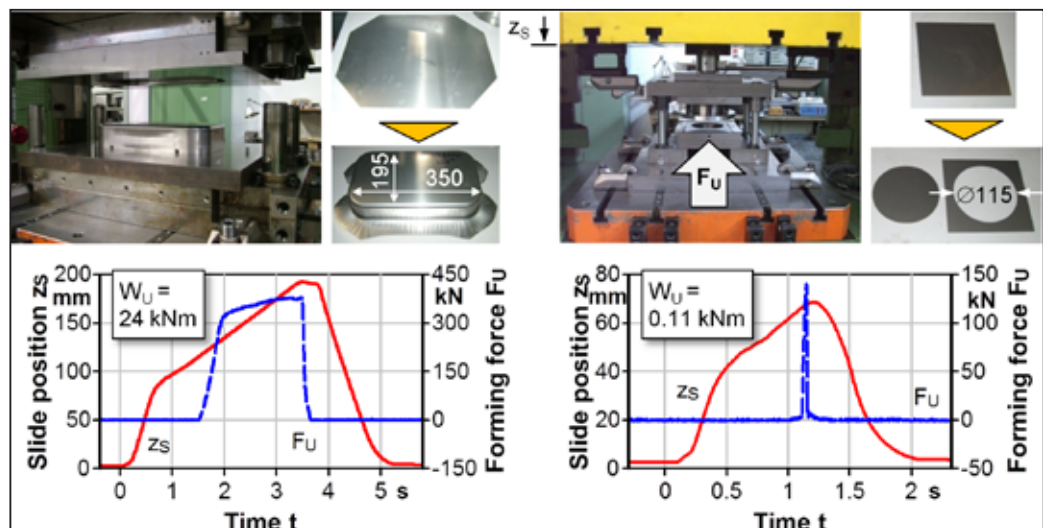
Drawing tool (left) and cutting tool (right), mounted in 1600 kN research machine
